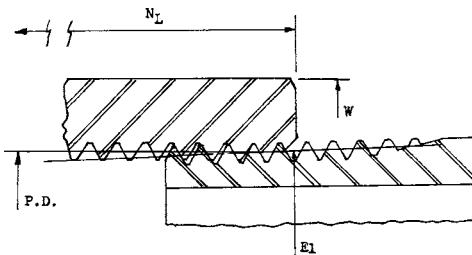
Straight-Tapped Coupling and Pipe (See Table 2 for Coupling Dimensions)
